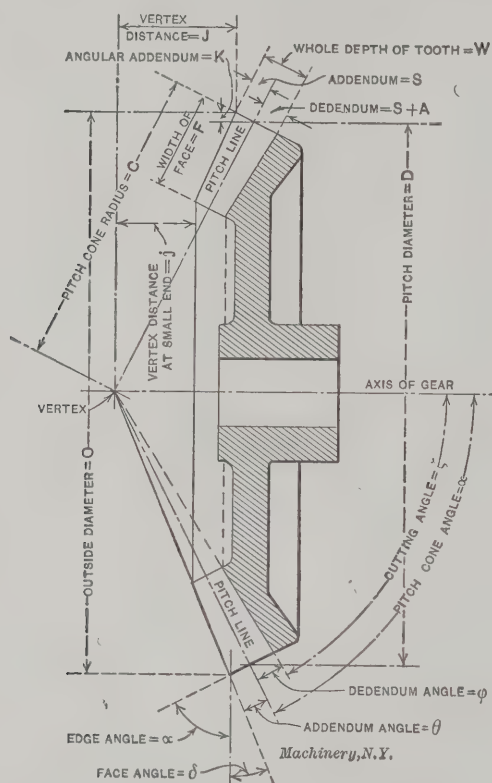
Dimensions, Definitions and Reference Letters for Ordinary Bevel Gear
